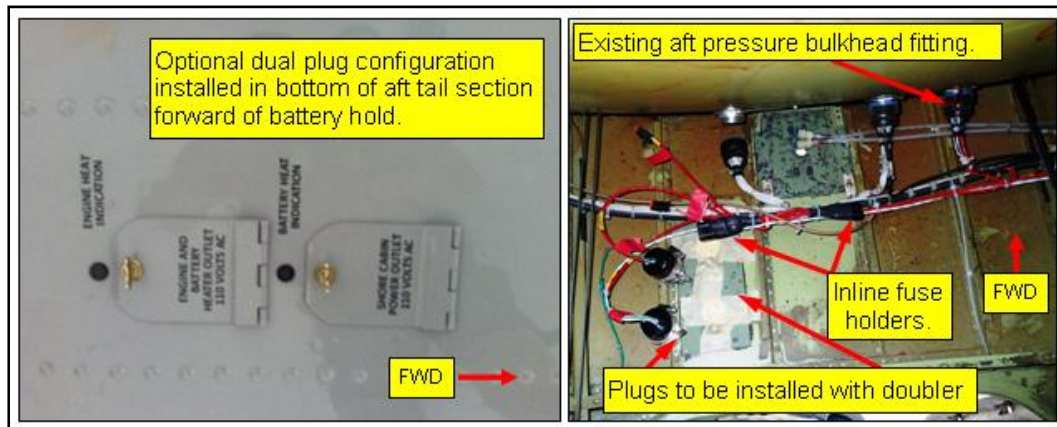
Example of option plug mounting location in tail section forward of battery hold access panel, aft of pressure bulkhead. Plug 1 for engine and battery and Plug 2 dedicated to interior AC outlet(s). Reconfigure cabling accordingly (requires additional cabling and connectors). Route engine lead and lead for interior cabin plug outlet forward through pressure vessel bulkhead using spare pinouts in existing bulkhead fittings when available. Shown above with 2 each TD02840 door kits dwg 02840, 2 place door kit TD03152 available for co-locating plugs in this area aft access panel.
